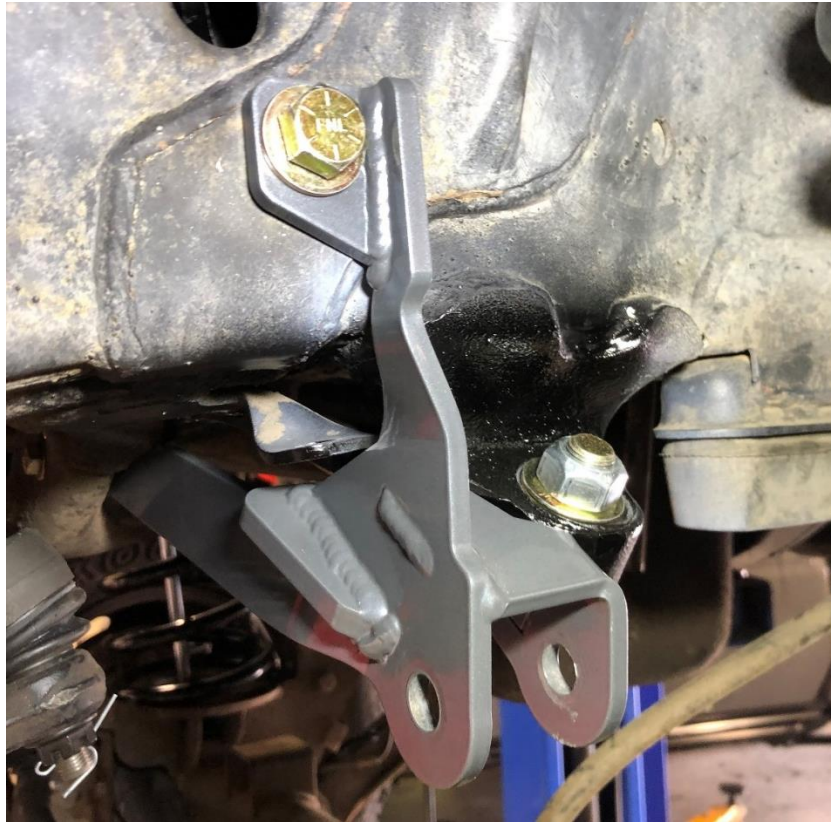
Installed Track Bar Conversion Bracket (Drivers Side View).
